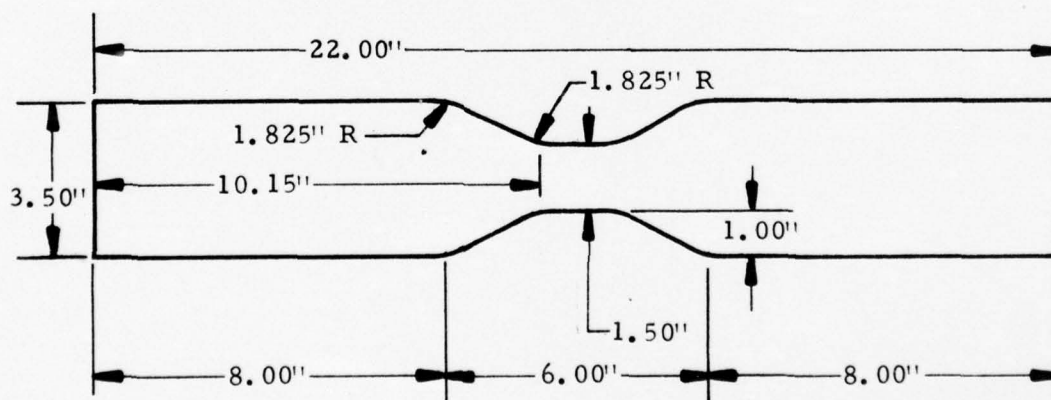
B FLEXURAL BEAM SPECIMEN - CONFIGURATION
